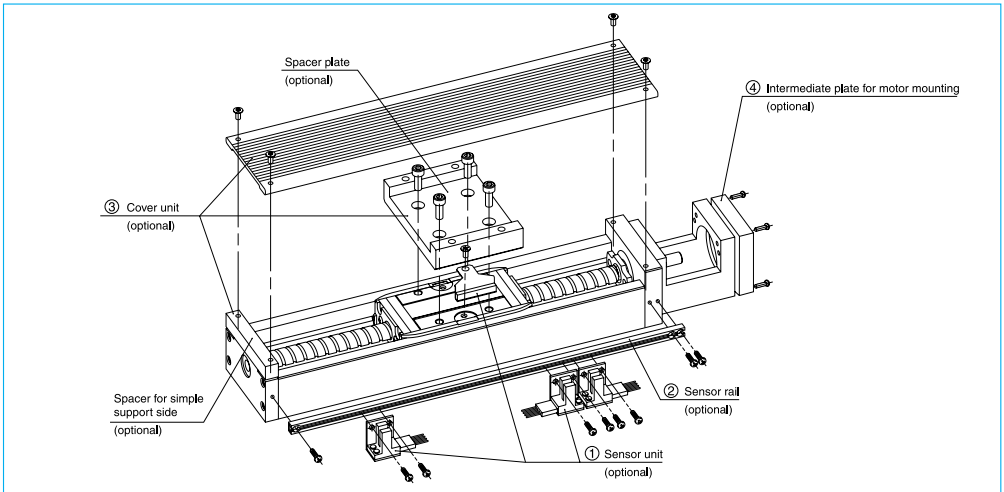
Assembly – Optional components for MCH10 (example)
